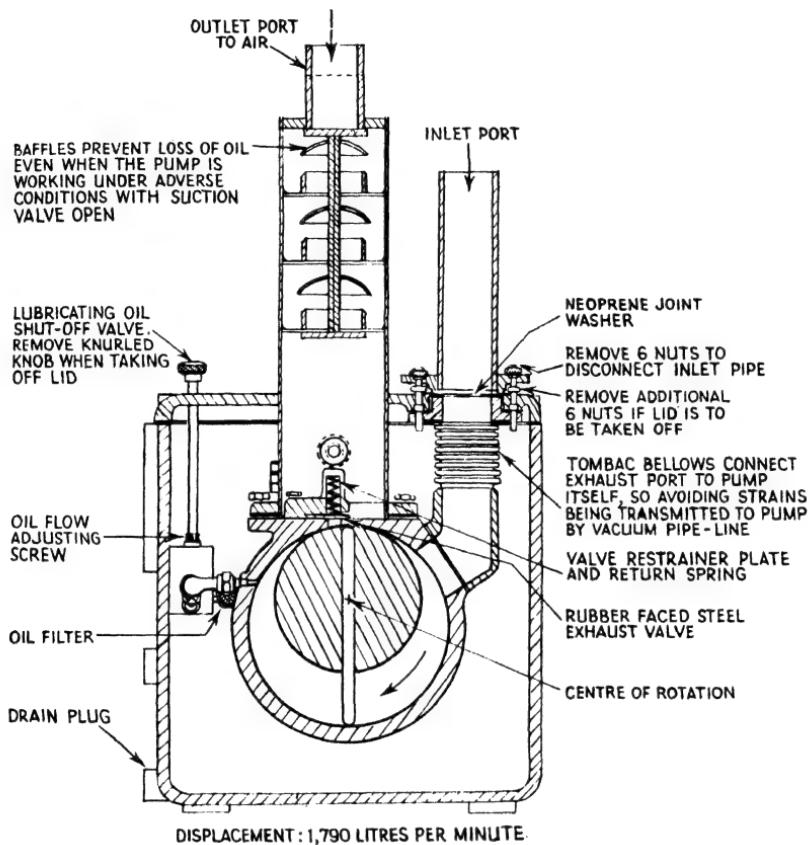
Large Rotary Vacuum Pump, Type SR5.
